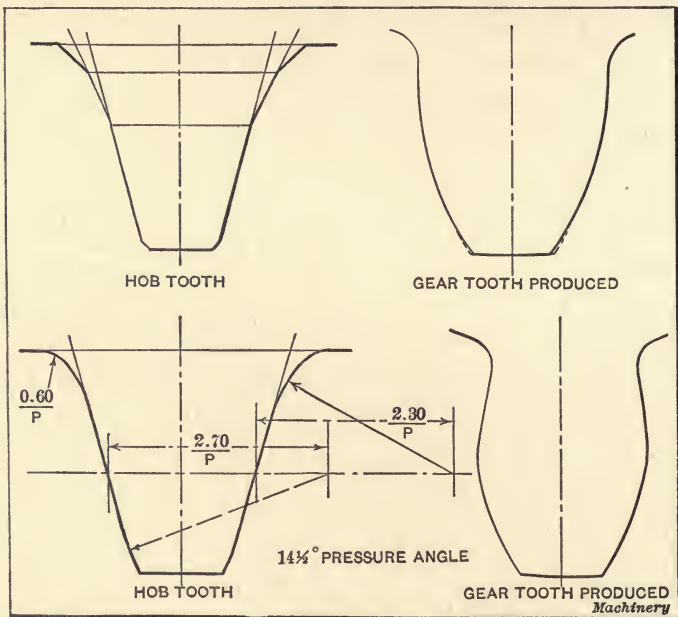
Forms of Hob Teeth and Gear Teeth Produced
